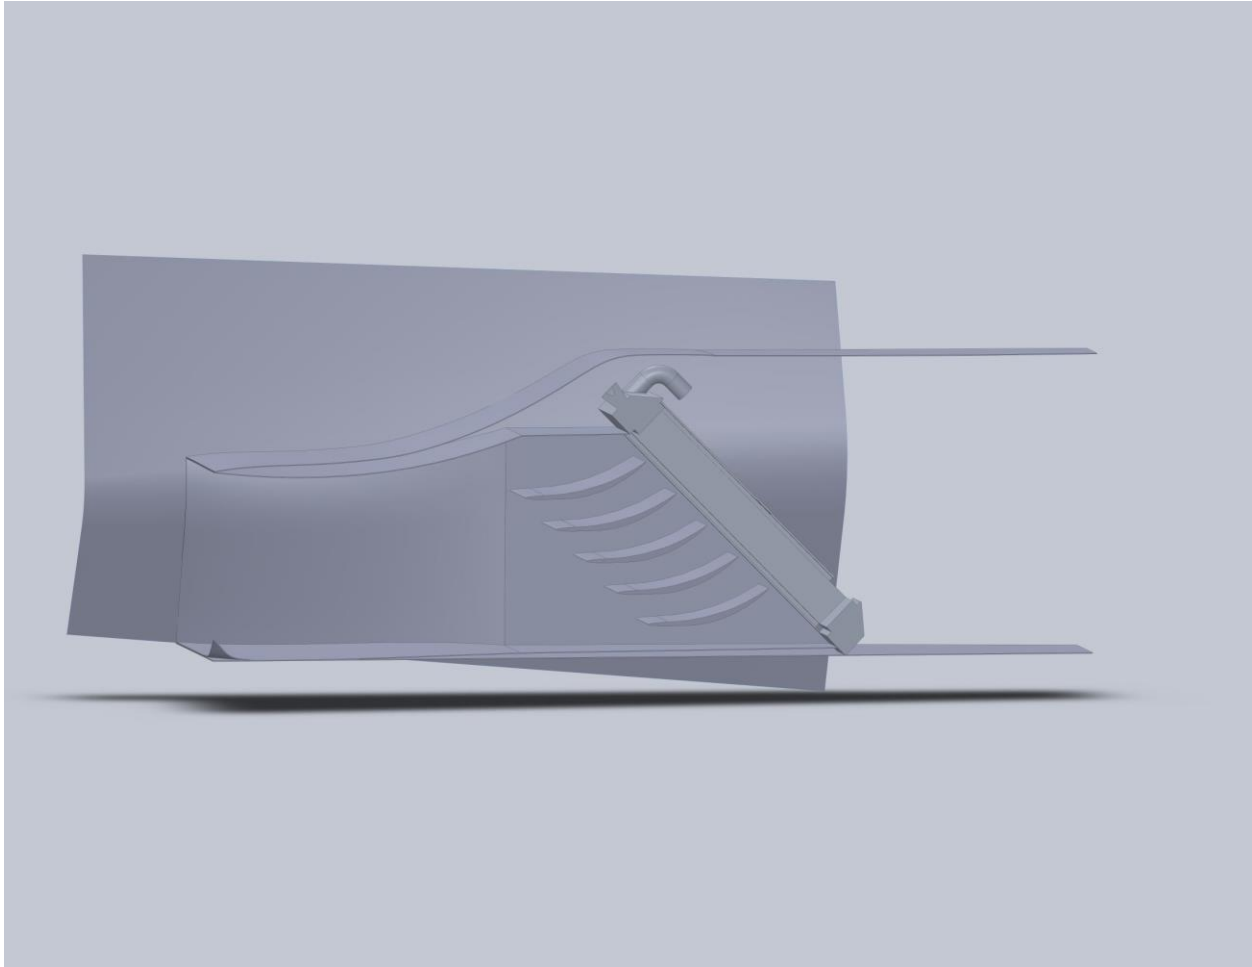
A cut view of the sidepod and radiator to show the turning vanes contained within the radiator shroud.
